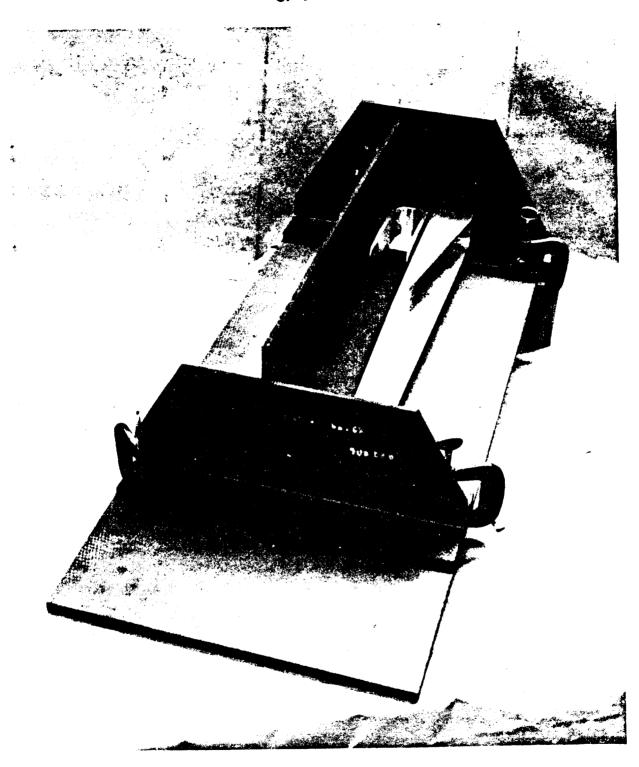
Z5943453-501 TIE-ROD RUDDER FITTING COMPONENT DURING SETUP FOR FINAL ASSEMBLY
